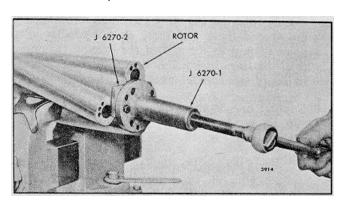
Removing Oil Seal Ring Carrier from Blower Rotor Shaft (Turbocharged Engine Blowers)
